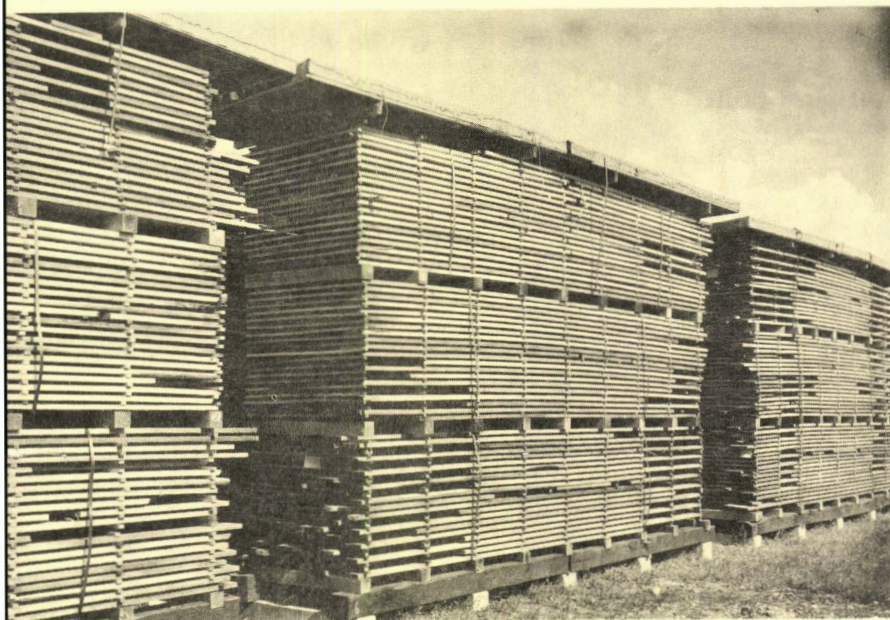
Unit packages built in the stacking jig. Equal-sized packages facilitate handling, tiering, and subsequent kiln drying. Uniform sticker spacing and good vertical alignment keep all stickers over pile bolsters. Good foundations and pile roofs also reduce degrade during drying.
